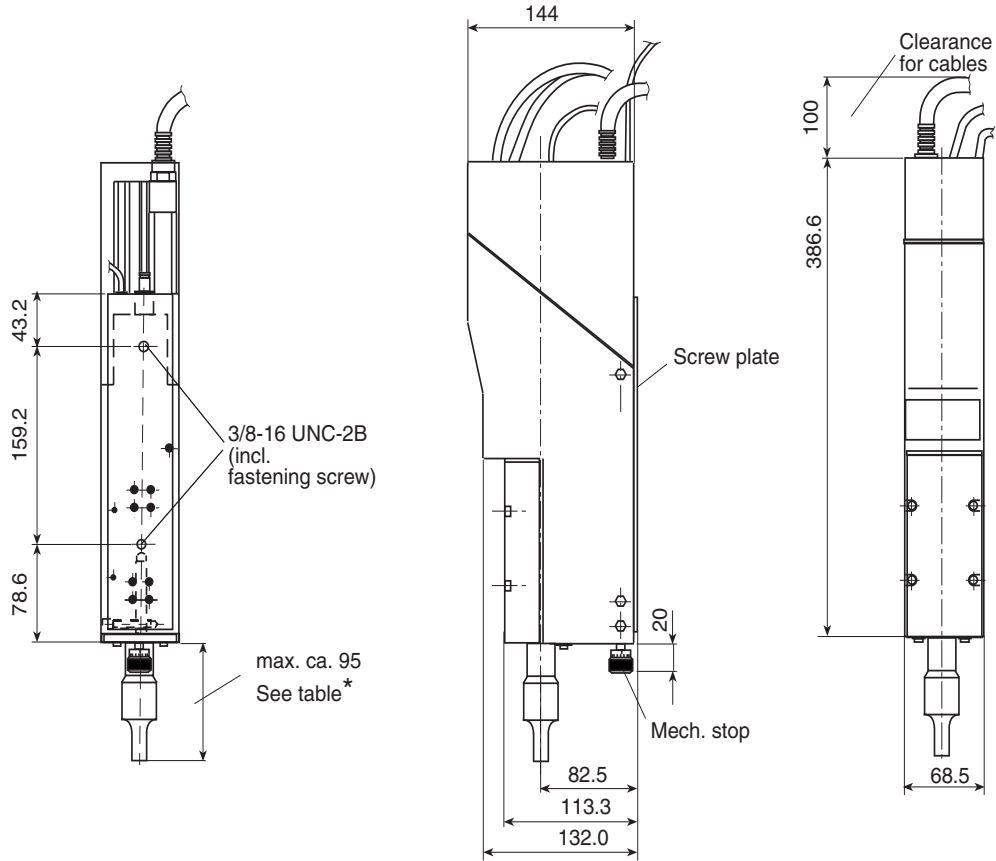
Dimensional drawing of aodm/aomc actuator Part 1
